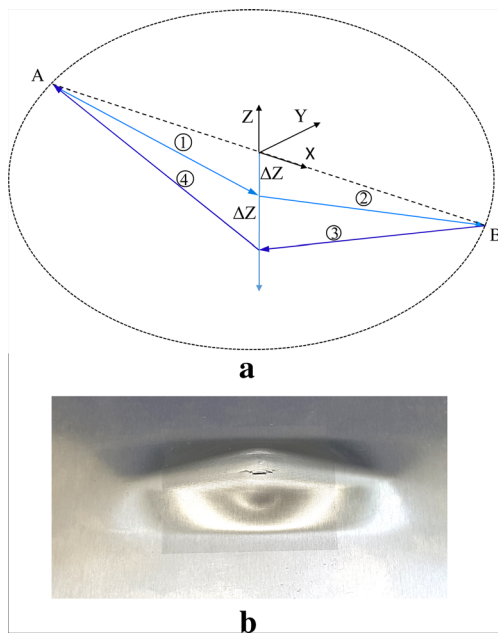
a Two-wing-star tool path. b Fracture happens for the two-wing-star tool path
